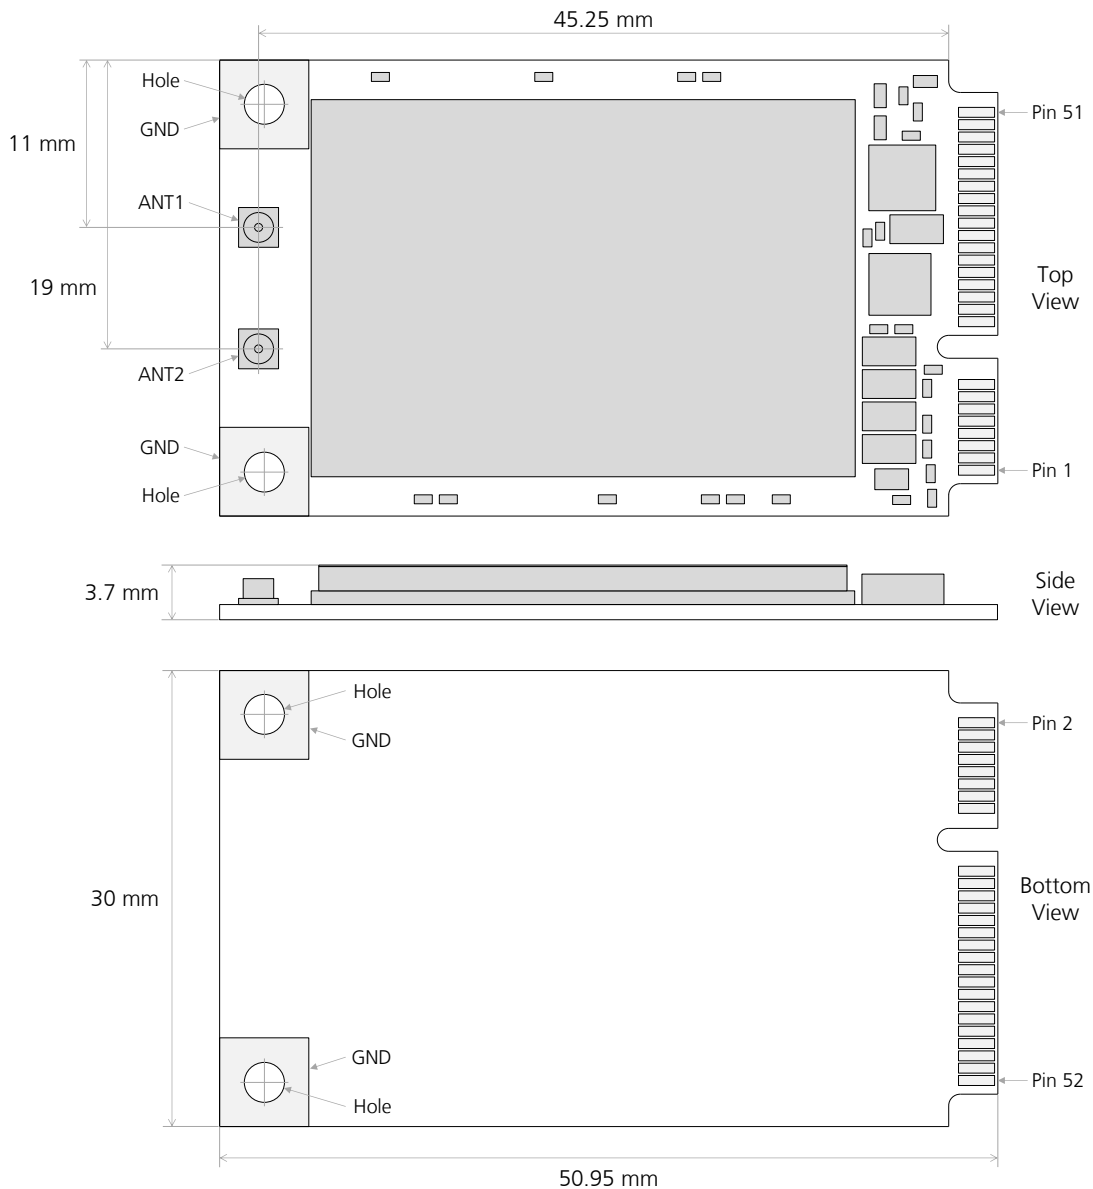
MPC1-L100 mechanical dimensions (Top view, Side view, Bottom view)
